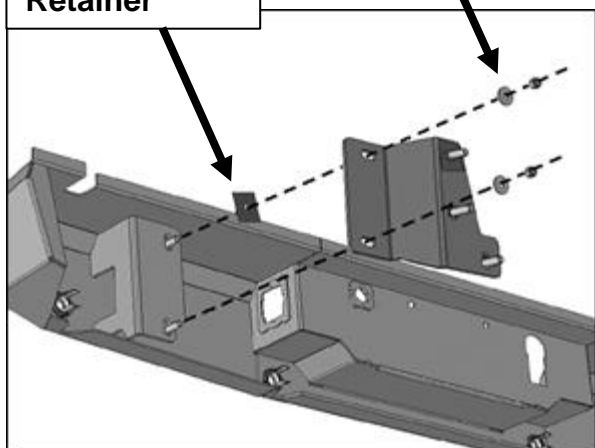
Attach factory bolt plate to passenger/right Mounting Bracket
